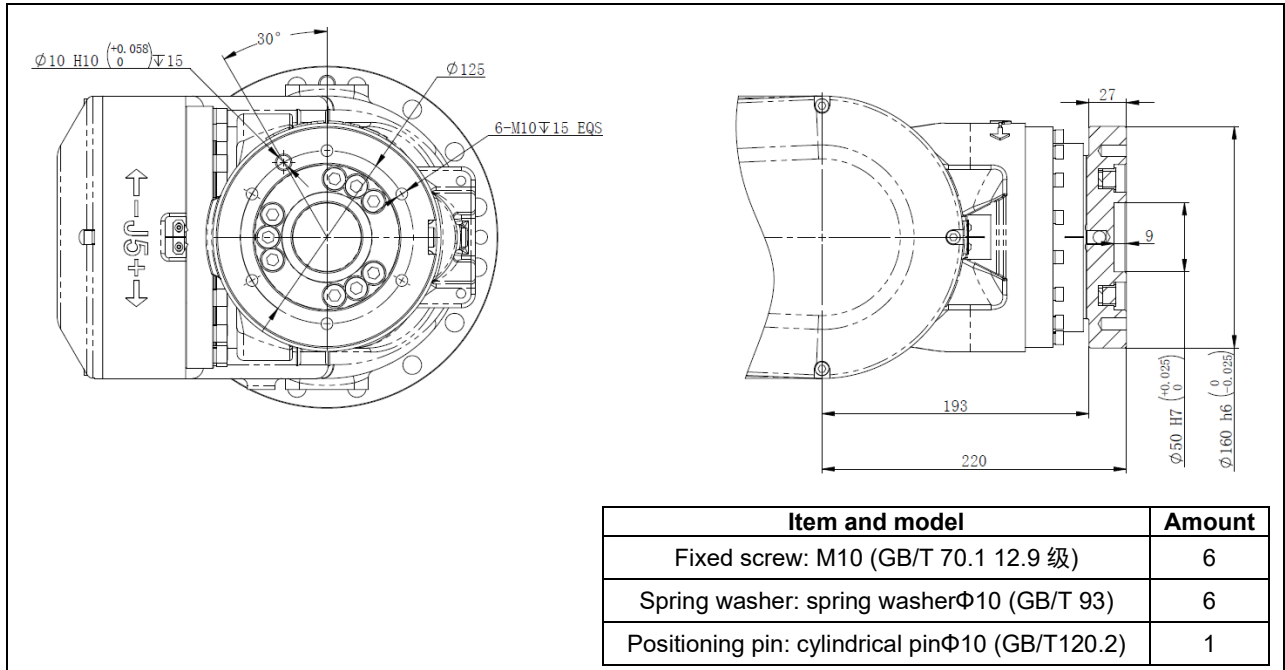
End flange mounting dimension (ER170B-2650)
